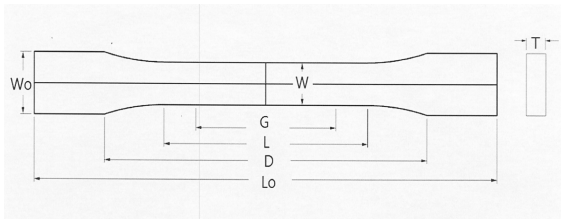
PLA tensile specimen (ASTM D638 Type 1)
